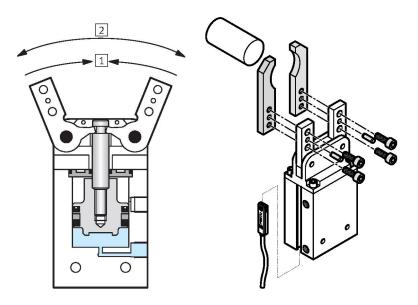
Angle gripper – sectional view, gripper jaw and proximity sensor
